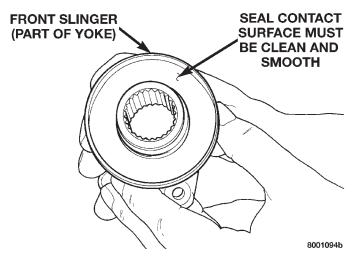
Seal Contact Surface Of Yoke Slinger and front case as an assembly. Do not attempt to remove the gear (Fig. 91)
